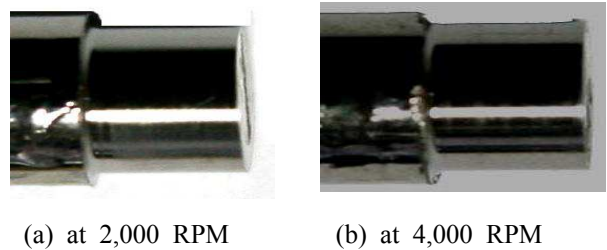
Appearances of $Zr_{50}Cu_{40}Al_{10}$ BMG specimens machined using a PCD tool (cutting depth is 0.2 mm)
